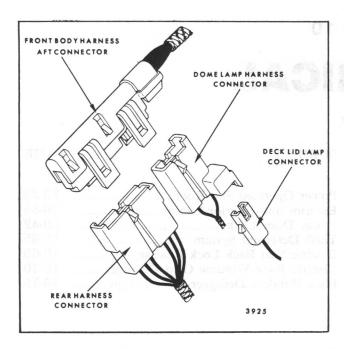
Front Body Harness - Aft Connector - "F" Style Shown
